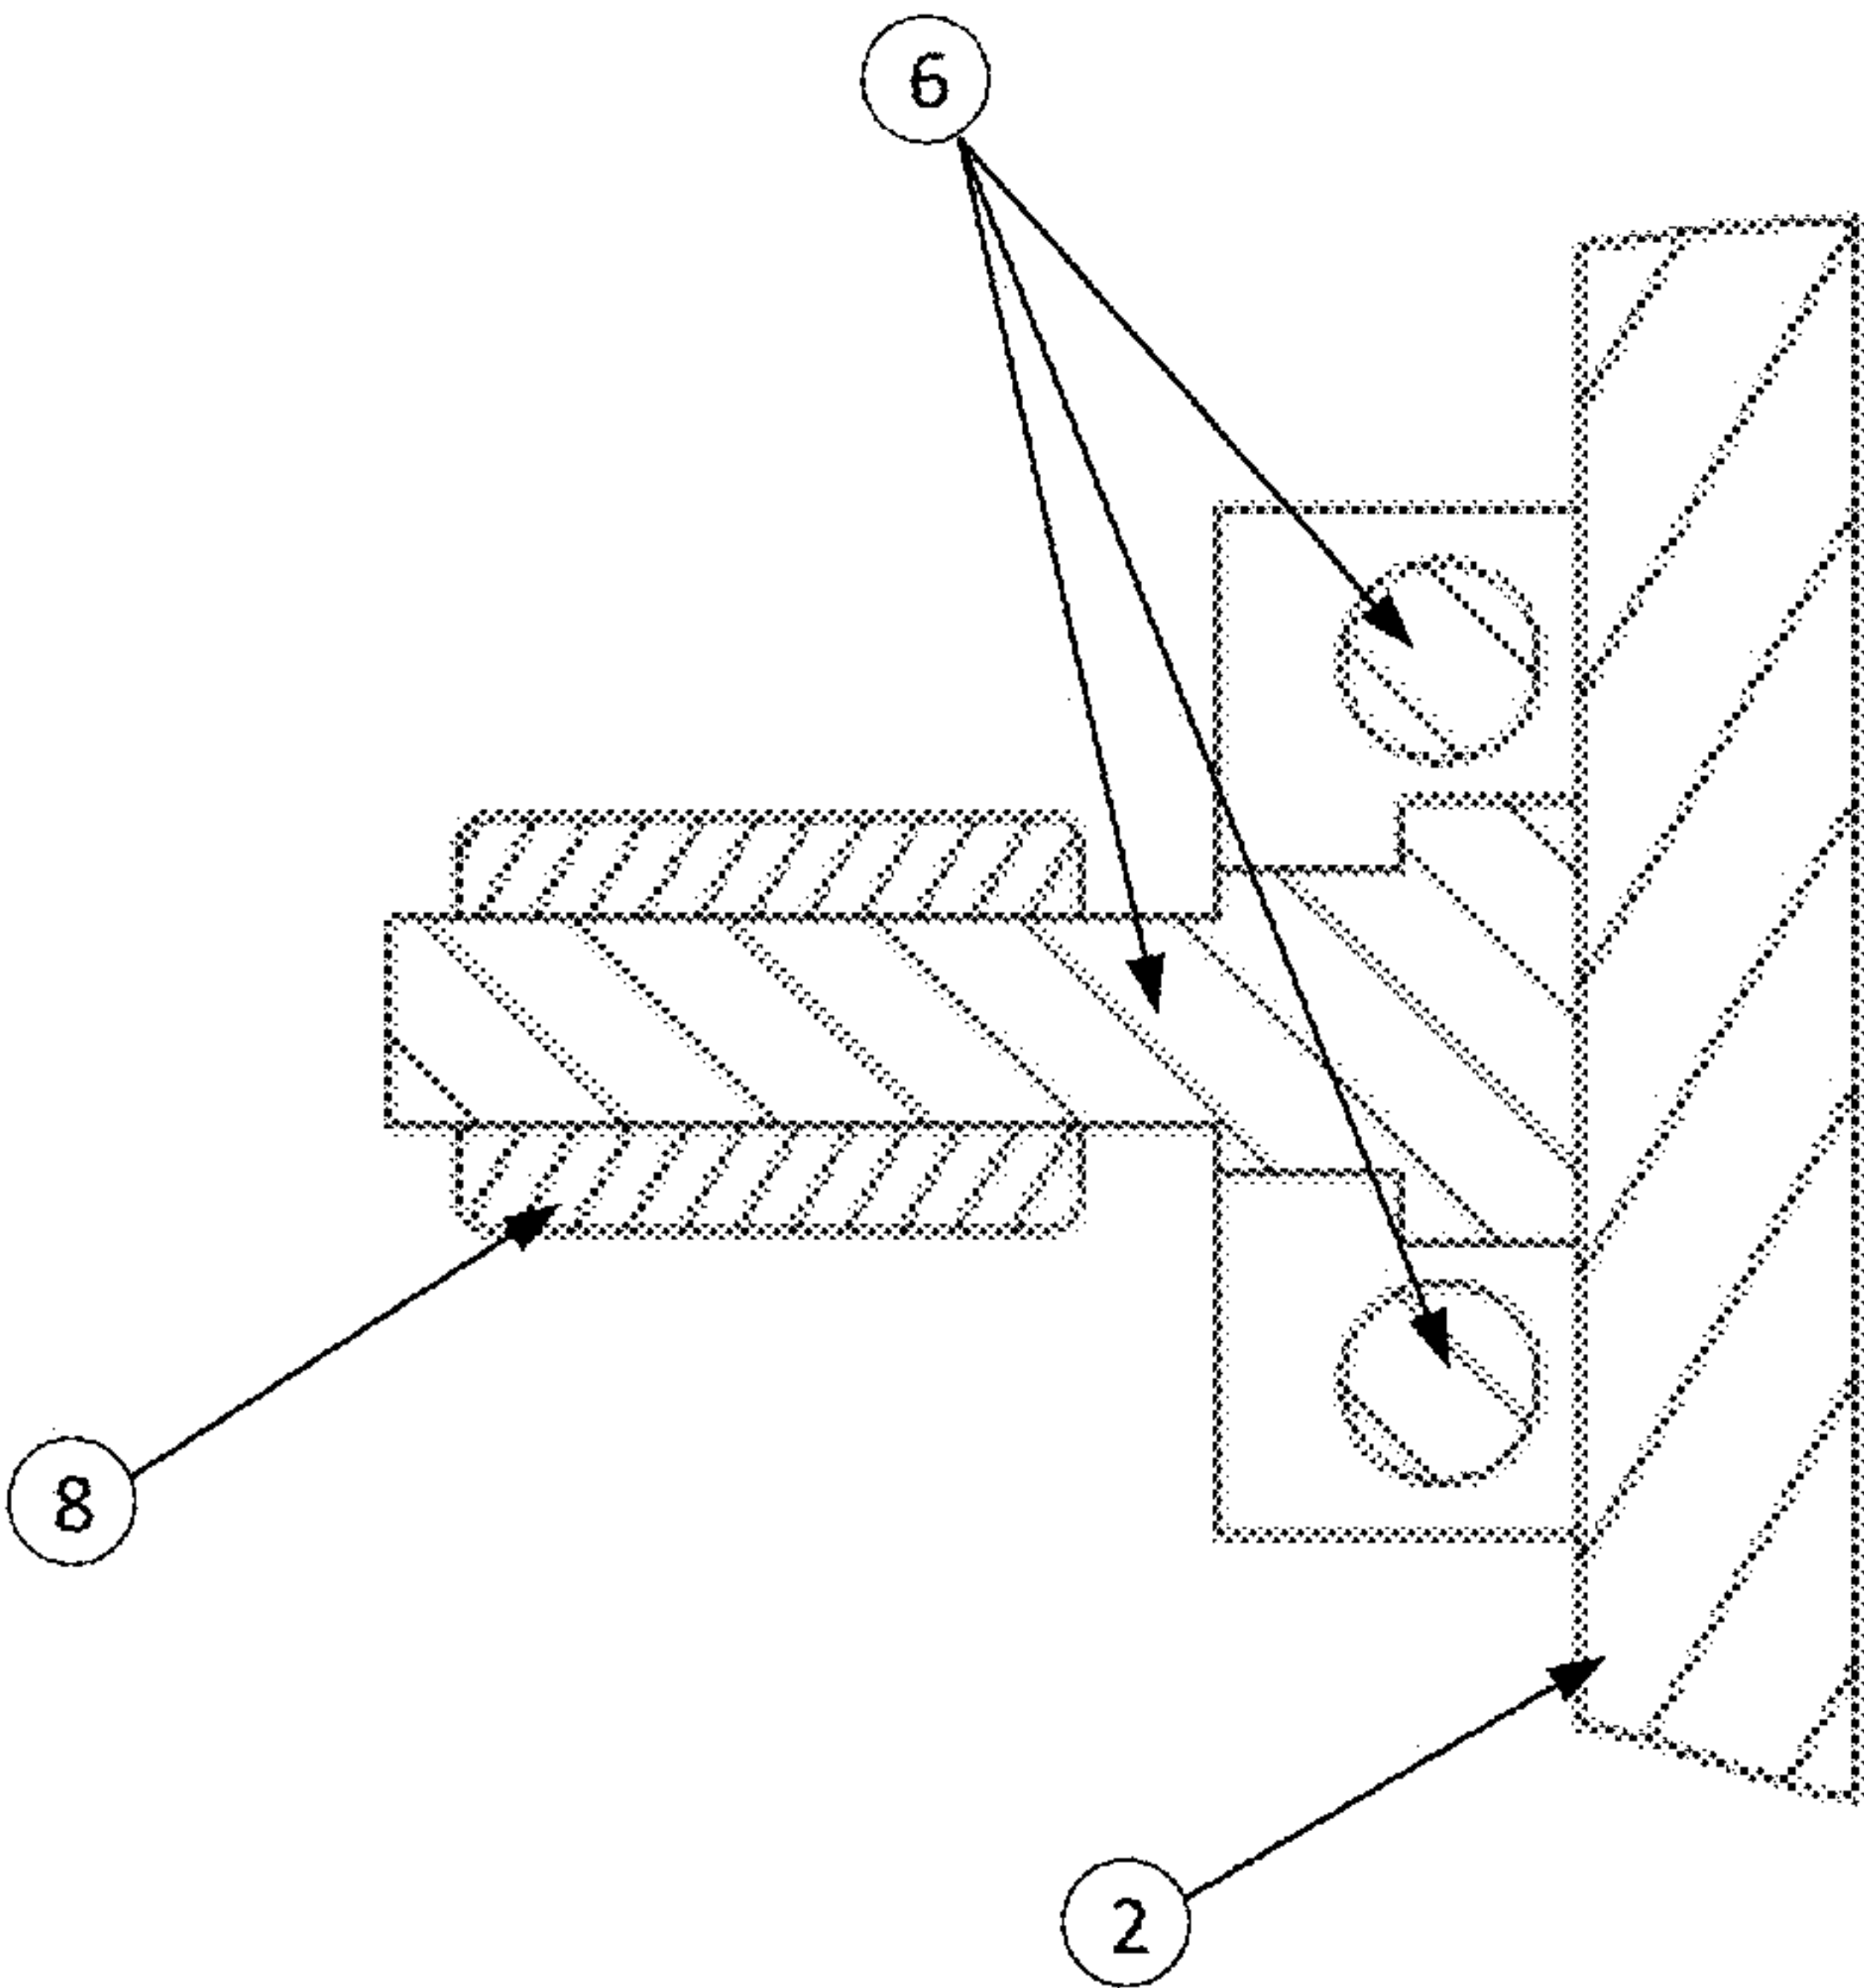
Cross Section A-1 - Slack Side Follower and Idler Roller
